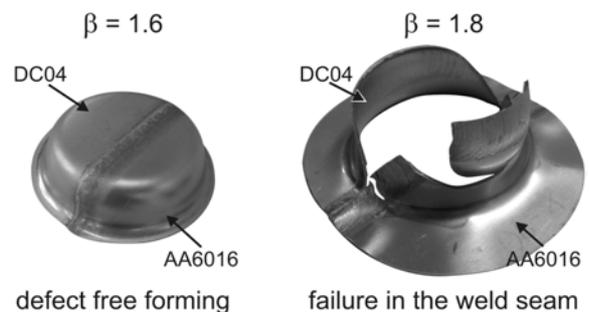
Results on deep drawing of laser assisted friction stir welded steel aluminium circular blanks
